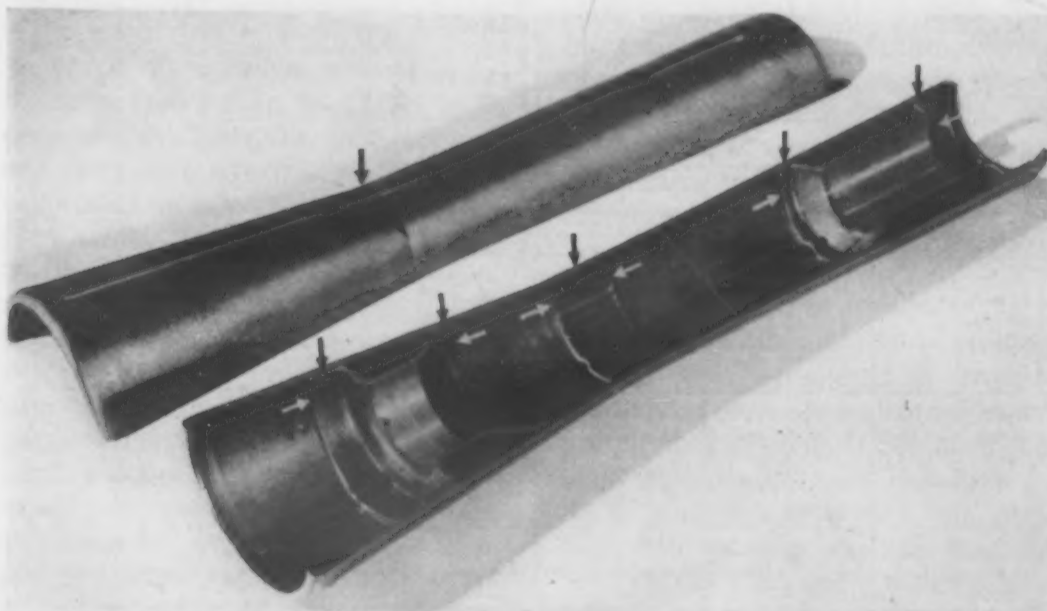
Cut away view of an aluminum alloy spinning bobbin, showing where parts were joined with the new adhesive.
